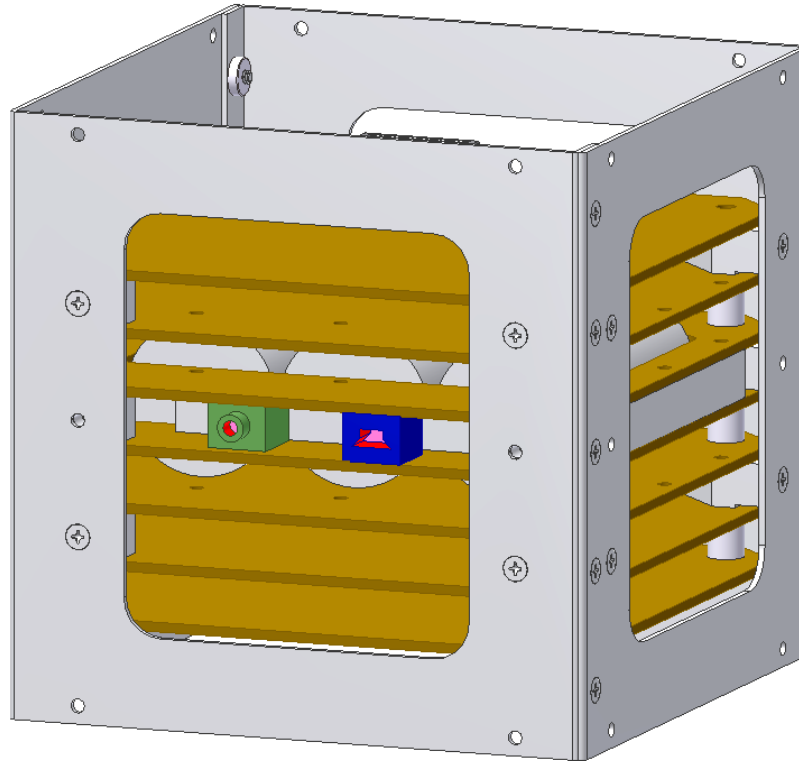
Fox-1 bare spaceframe with centrally mounted PCB stack.
